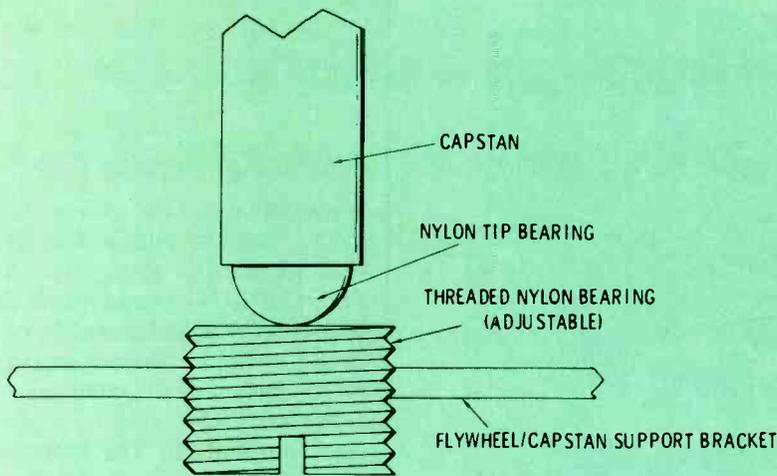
Delco Model T-400 tape players use two nylon bearings in the flywheel/capstan assembly. As shown here, one is threaded so that its pressure against the nylon tip can be adjusted. If too much pressure is exerted by the threaded bearing, the speed of the player will be reduced.
